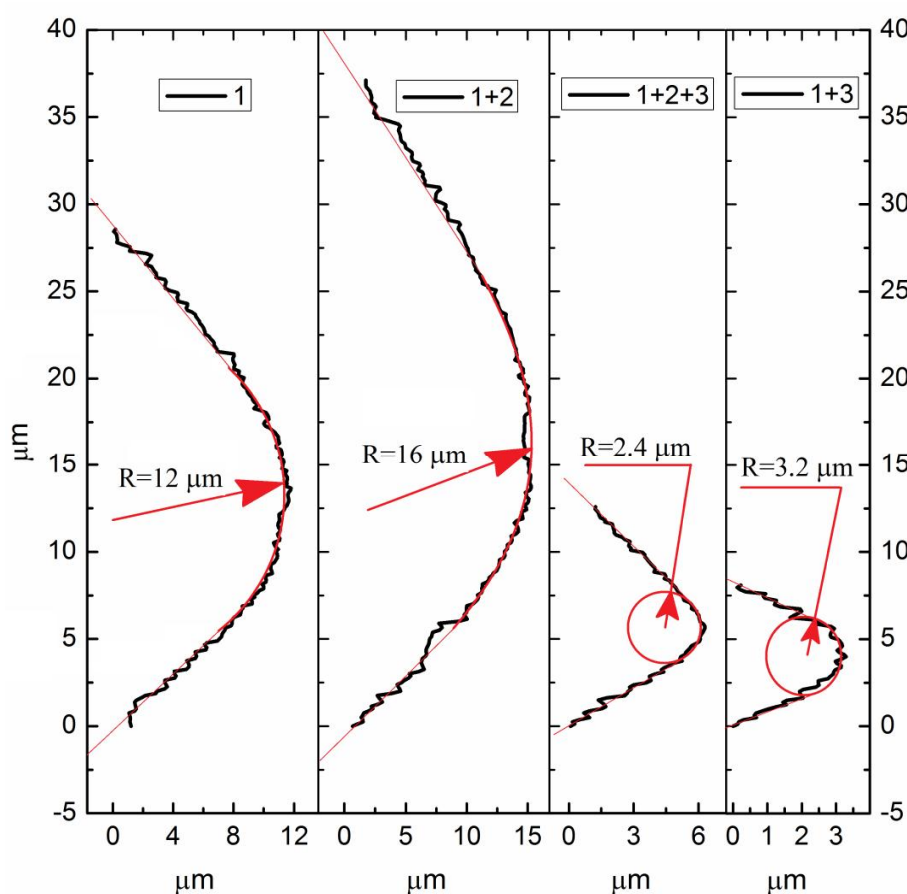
Front section of changeable carbide insert cutting edge after grinding with diamond wheels: 1 – AC4 100/80, 2 –AC6 80/63, 3 –ACH 40/28
